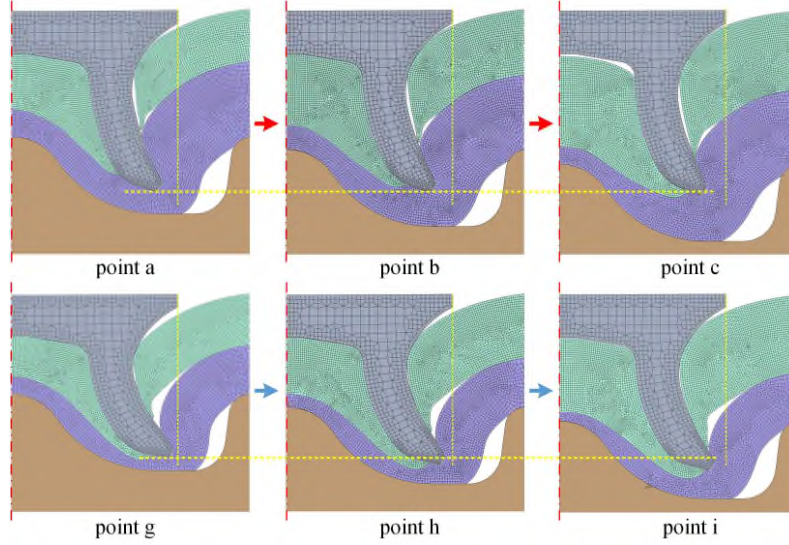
Deformed rivet shank in SPR joints with different top and bottom sheet thicknesses
